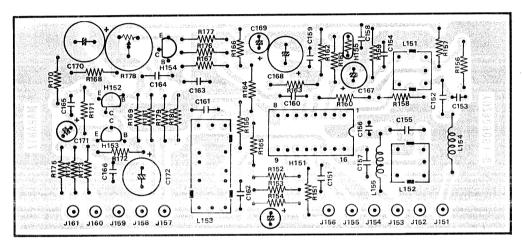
AM Tuner Board - P150 Component Assembly Diagram
